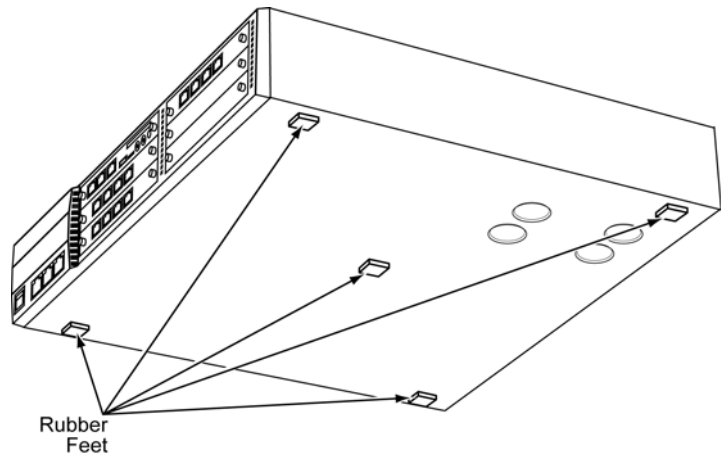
Install Rubber Feet (Multiple Chassis)
